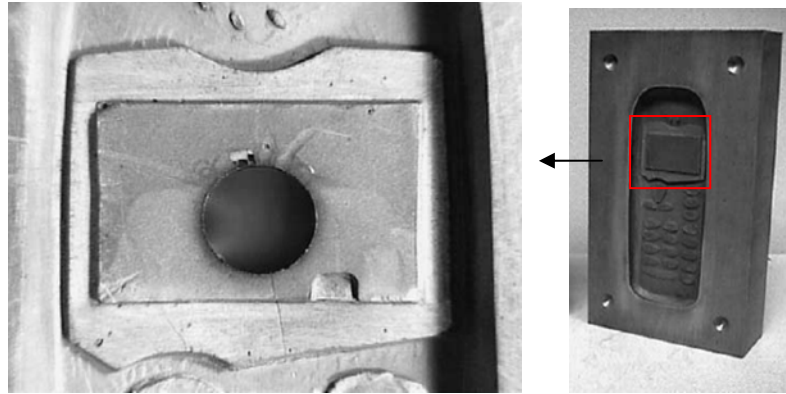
Cracks appearing on the surface of a mould half (source: Cheah *et al.* [34])
